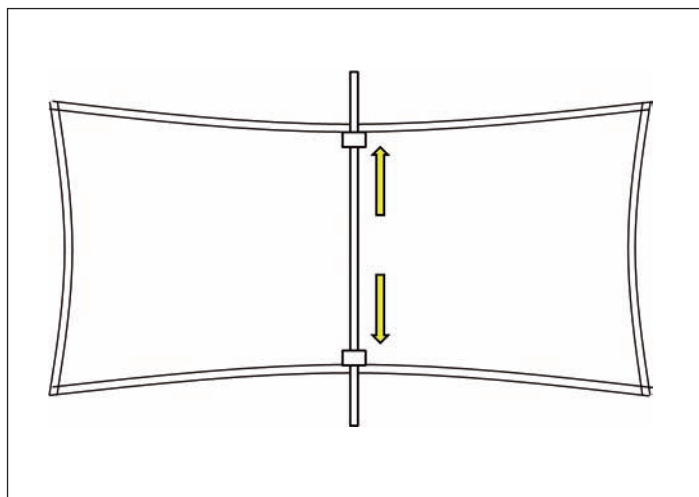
Realignment using a Quick Lock device (exert pressure from inside to outside)
